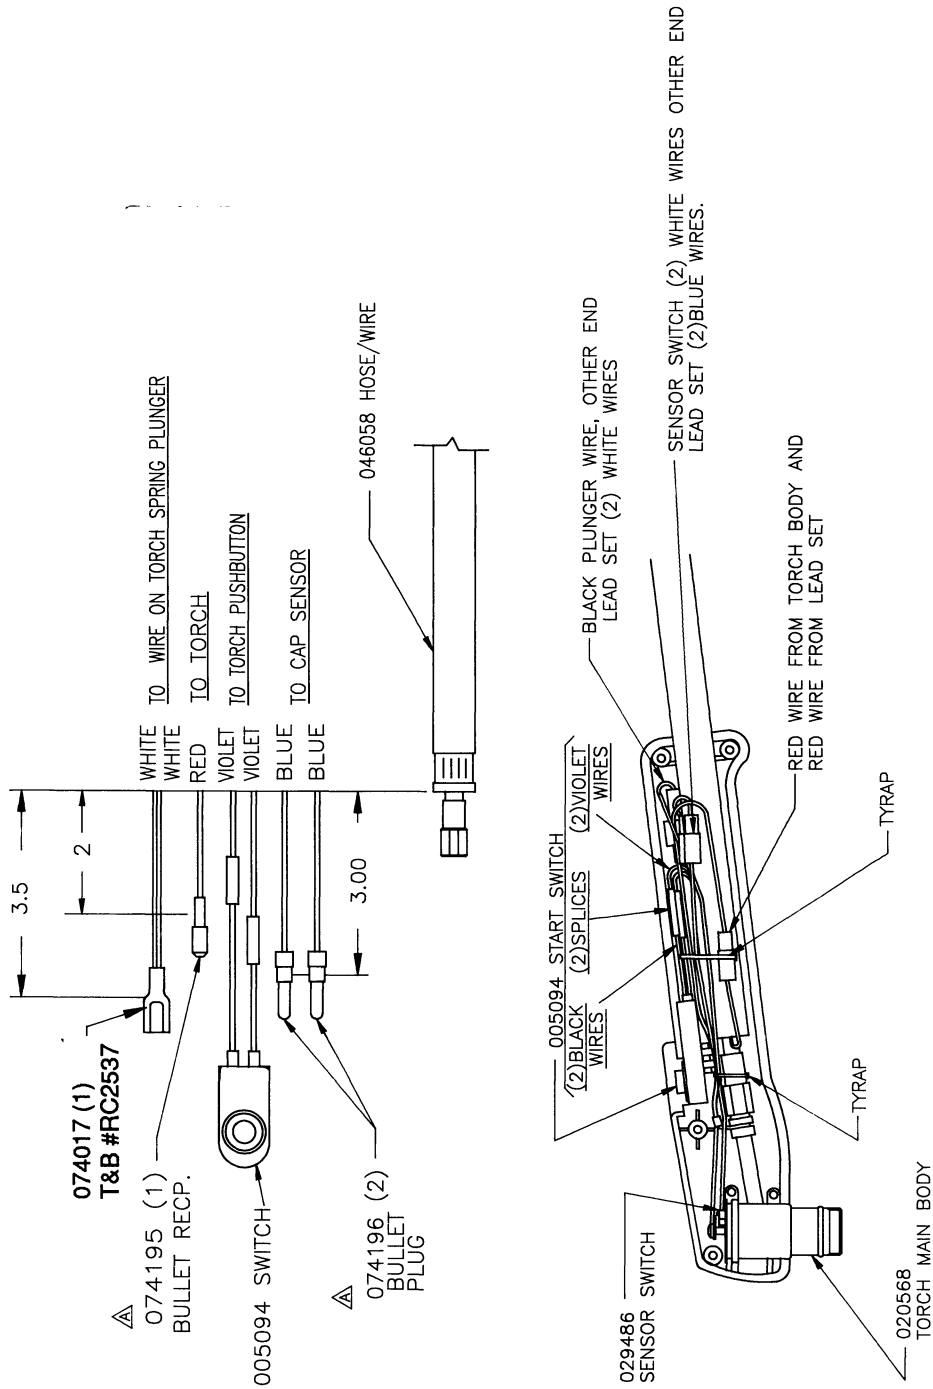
PAC120 Torch Retrofit Kit Installation (Sheet 2 of 2)
